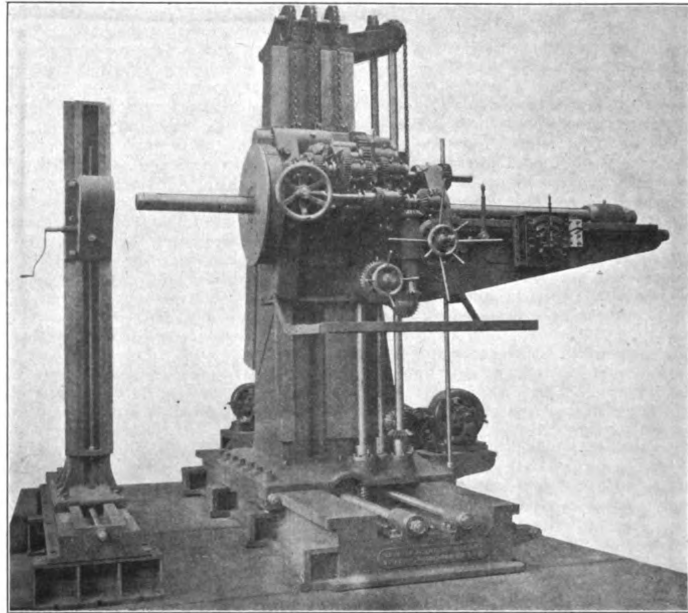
The Detrick & Harvey Horizontal Boring Machine.
